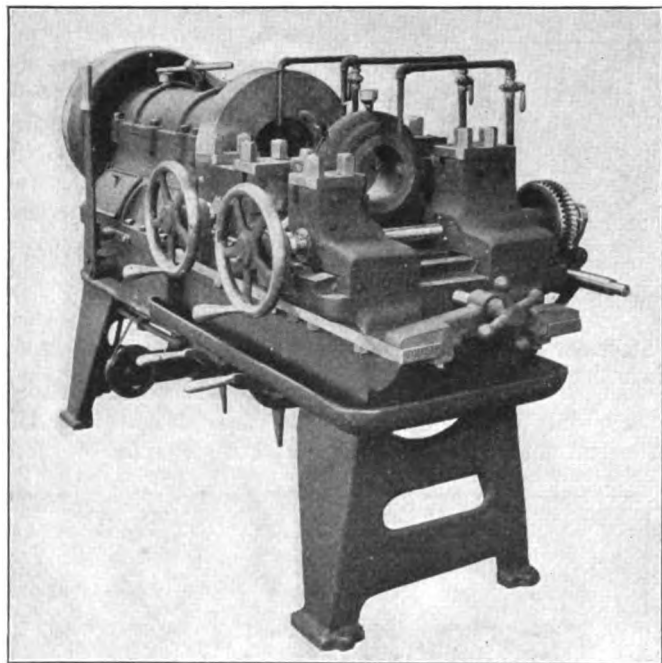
HEAVY-DUTY CUTTING-OFF LATHE
